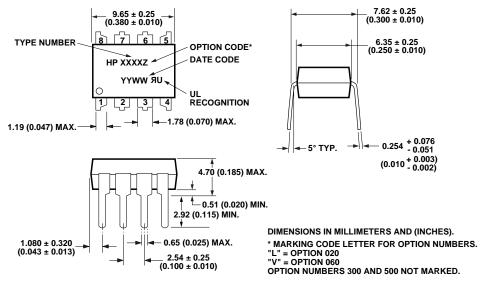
HCPL-4506 Outline Drawing (Standard DIP Package).
